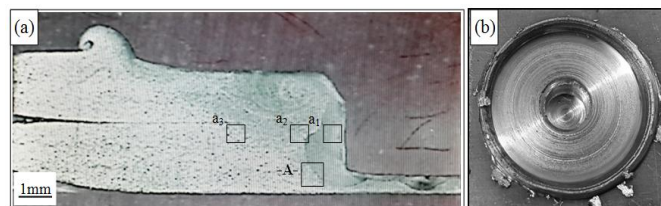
(a) A macroscopic appearance of the cross-section of a conventional FSSW specimen made by the triangular tool pin profile at rotational speed of 535 rpm, (b) a top view of the weld
